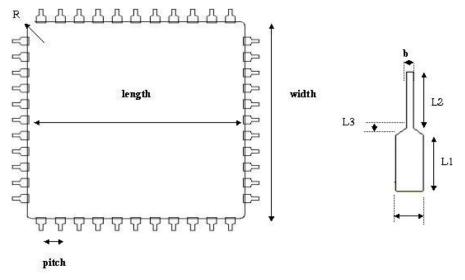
Quad Flatpack Package with gull wing shaped pins, with pin detail
